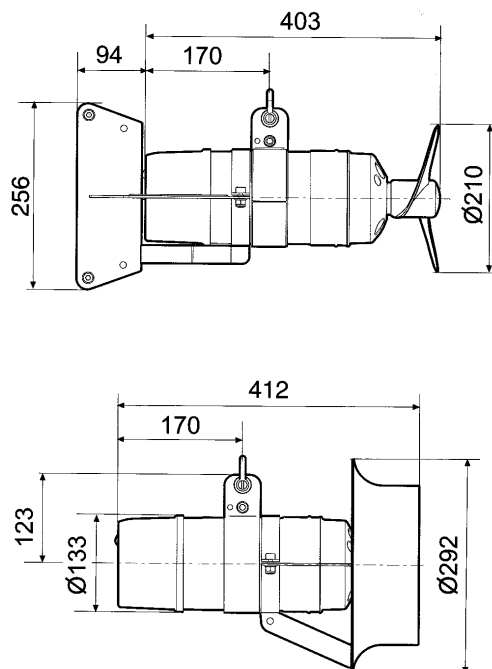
Dimensions for mixer 4620 (all dimensions in mm).
